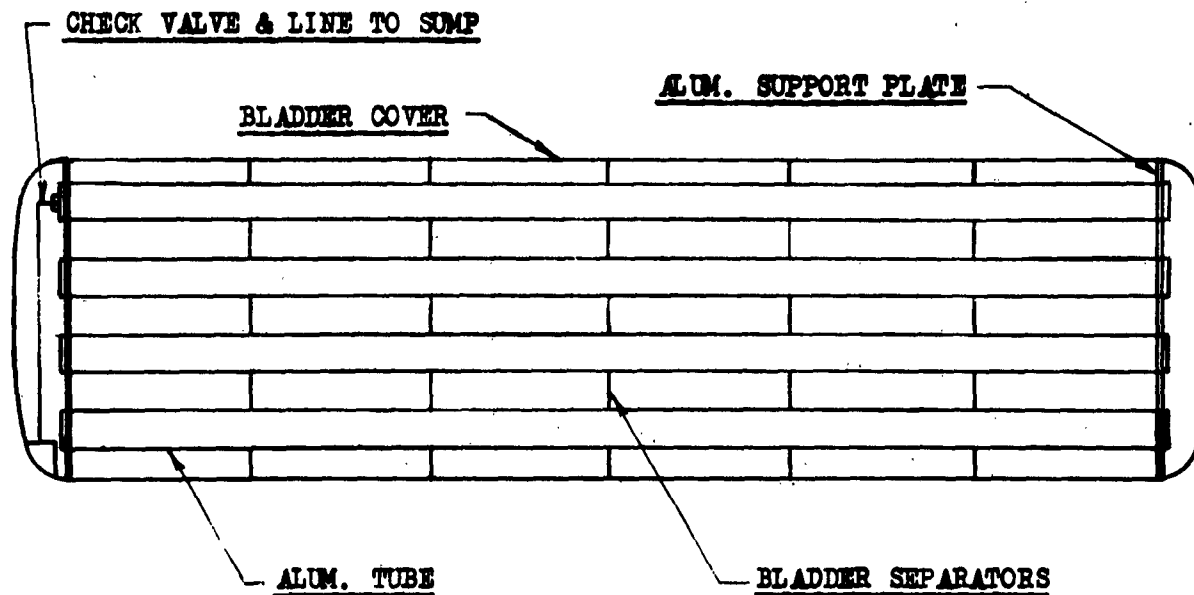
HORIZONTAL ALUMINUM TUBE TANK-DESIGN ONE
